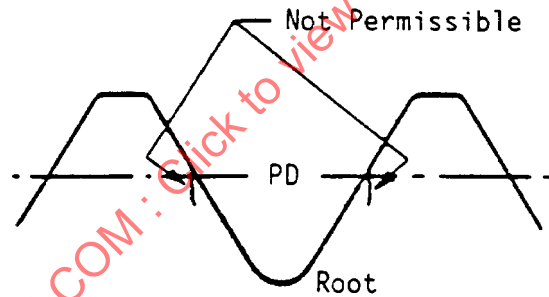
Laps Below PD Extending Toward Root, Rolled Thread
